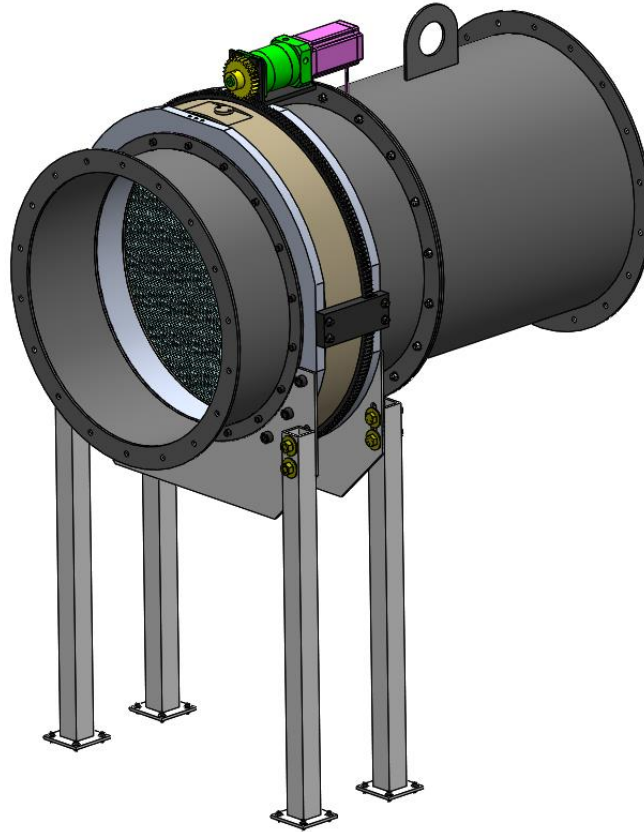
CAD View of Inlet Distortion Traverse Assembly
